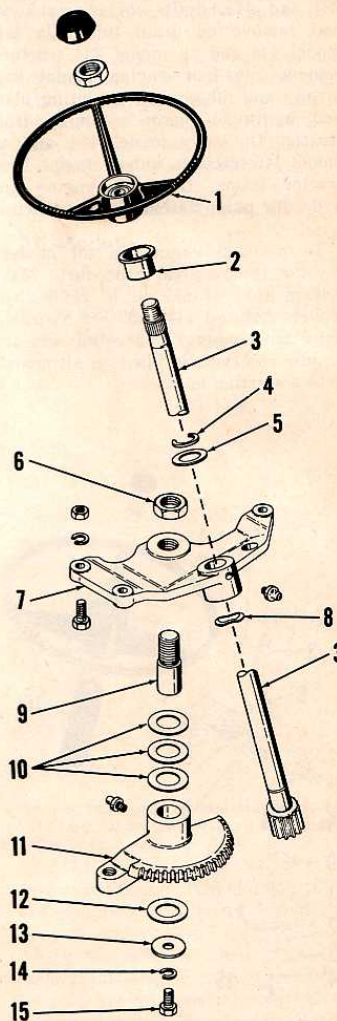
Exploded view of steering gear assembly used on early model 444 tractors.
